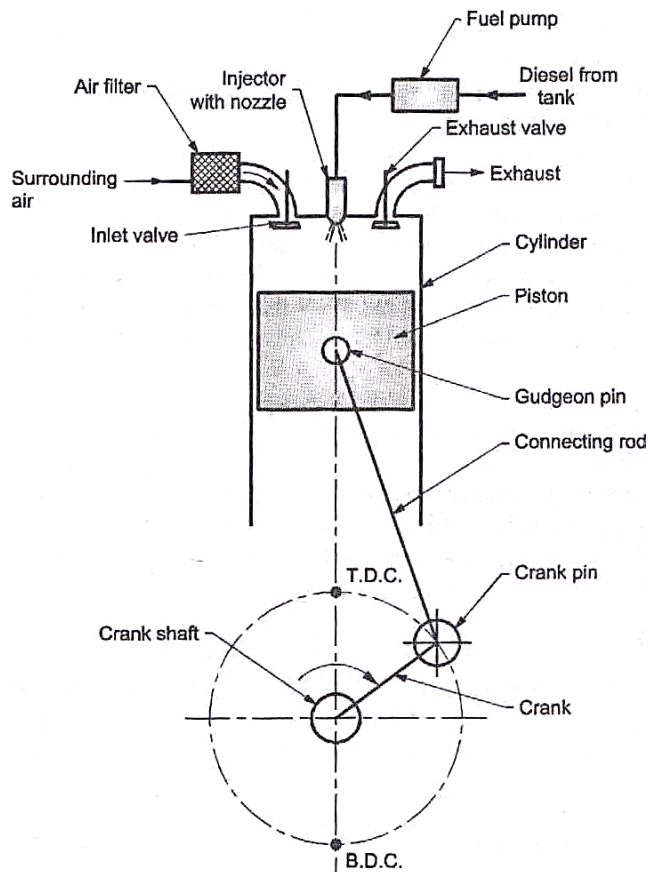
Four Stroke C.I./Diesel Engine.
